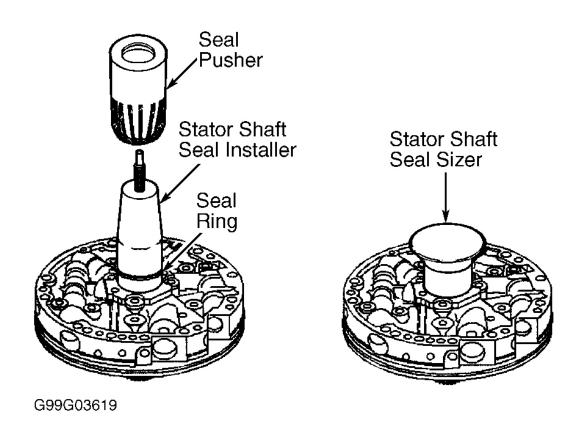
Installing Oil Pump Stator Hub Seal Rings Courtesy of GENERAL MOTORS CORP.
